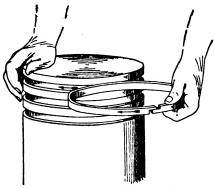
Starting Piston Ring in Groove to Test the Fit
